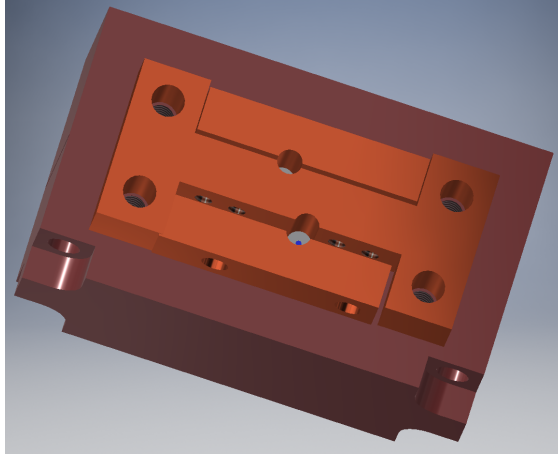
3D drawing of the cavity (dark red) with the pin clamp constituents (red). The pin clamp consists of one H-shaped part, which is fixed onto the cavity, and two smaller parts that clamp each of the wire connectors.
